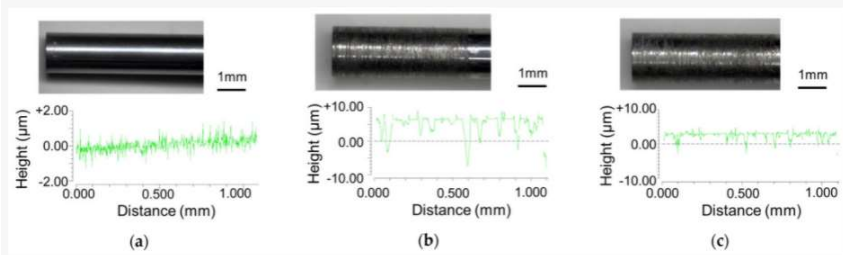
Longitudinal section cross-sectional images of the extrusion: (a) mirror surface punch; (b) grooved punch (depth 10 μm); and (c) grooved punch (depth 5 μm).
